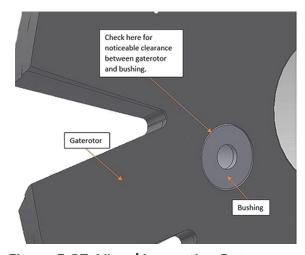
Visual Inspection Between Gaterotor and Bushing
